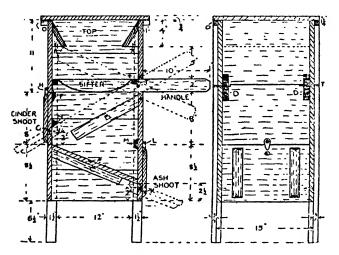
Fig. C.—Side Sectional View. Fig. D.—Front Sectional View.
